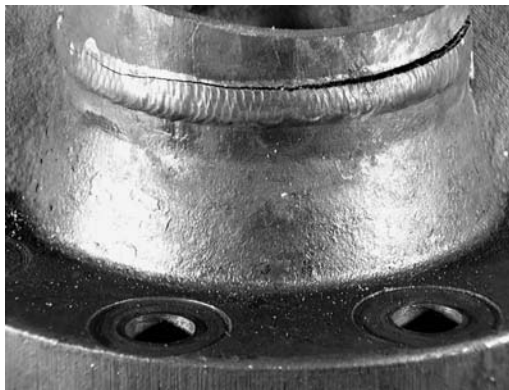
SCC due to caustic concentration at a welded steam line flange; macro view.
